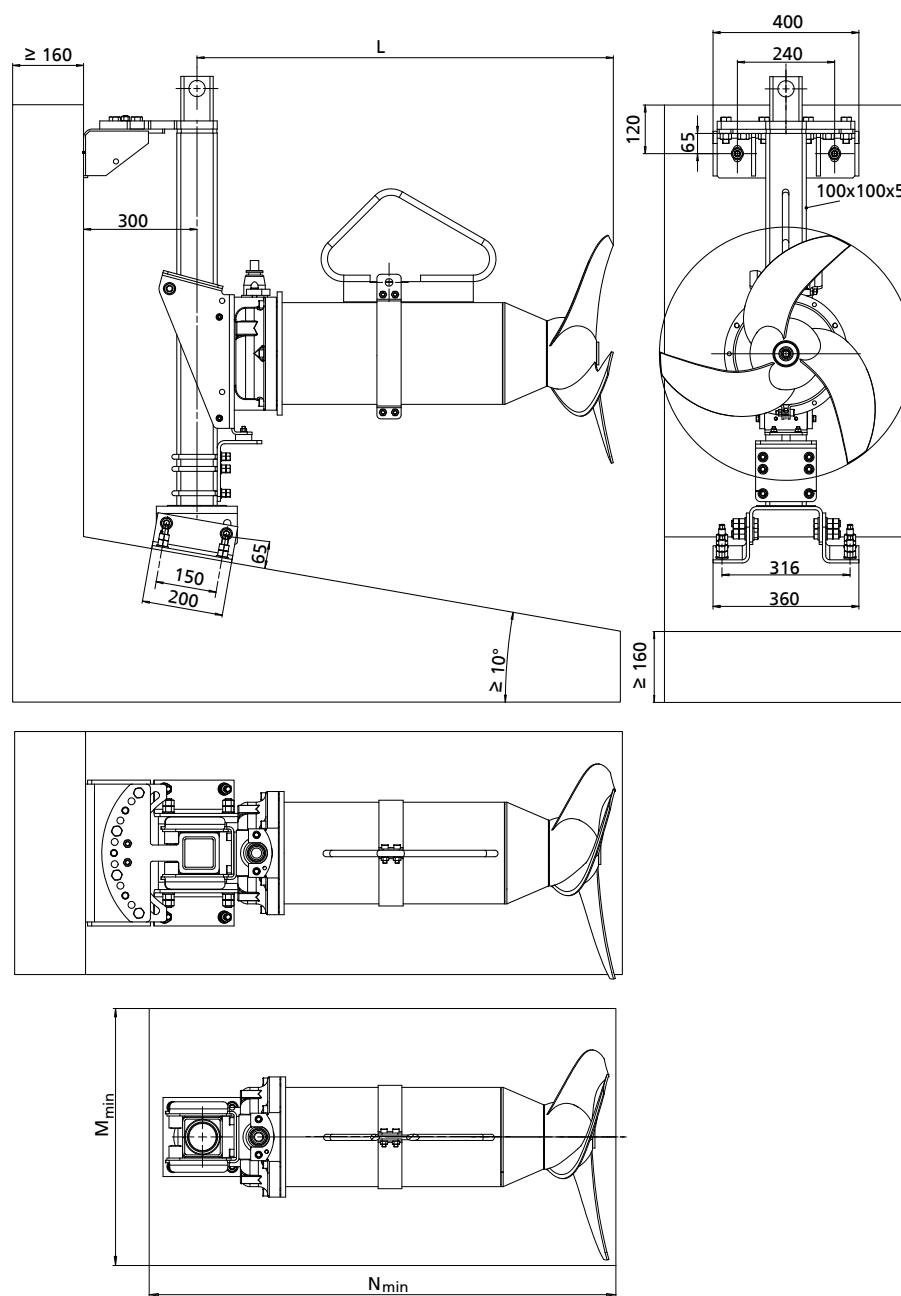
Installation with accessories 22 - Amamix 400 (size 4135 only) / 600
